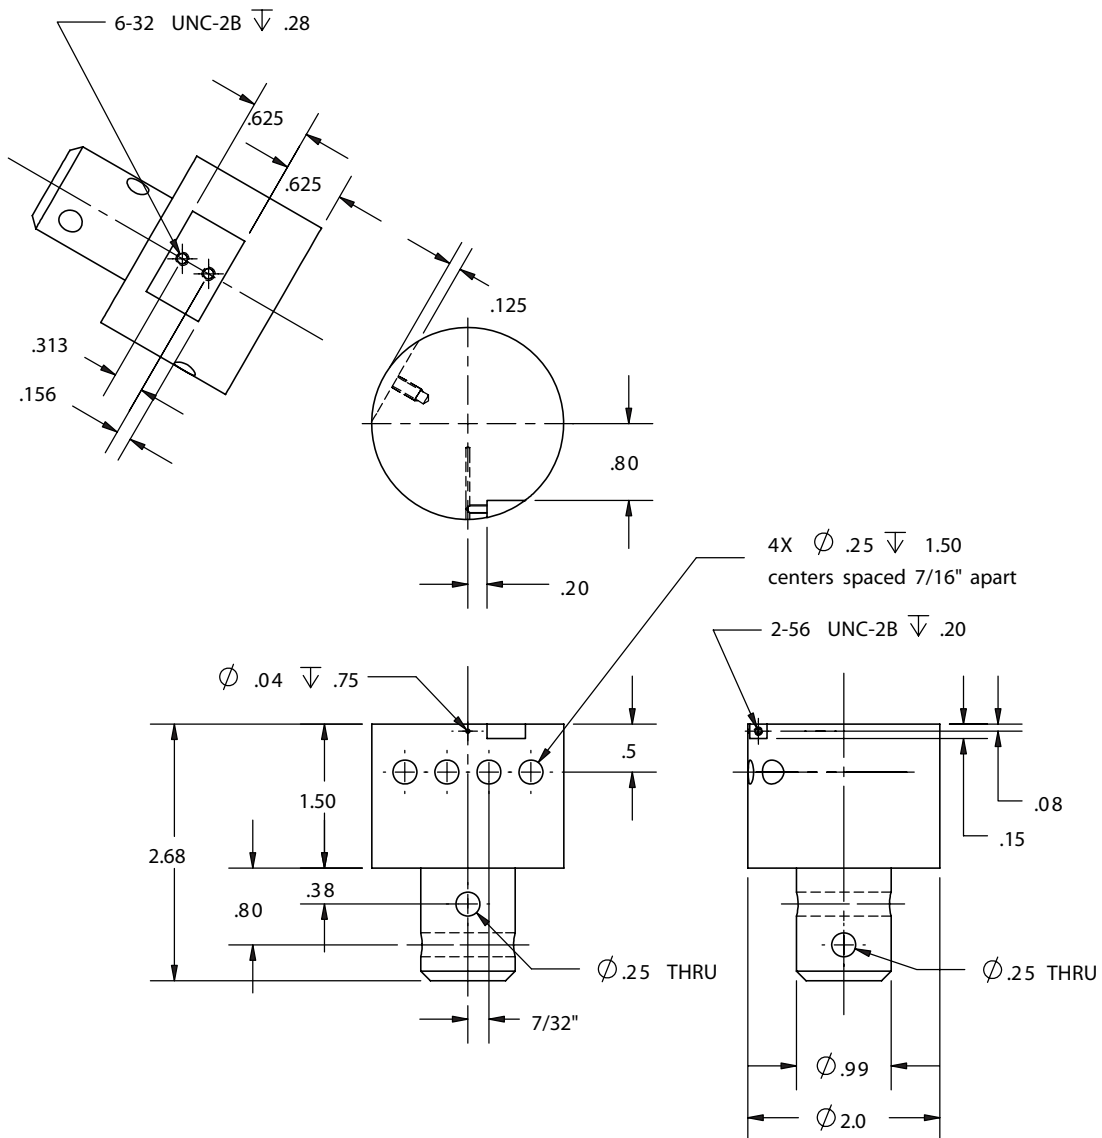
Drawing of the second generation bottom steel heated platen. Uses pins to connect to bottom connector. Dimensions in inches unless otherwise noted.
